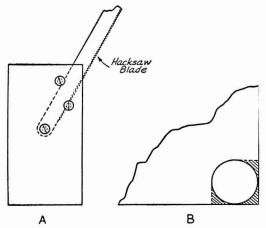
To cut rectangular holes in a chassis corner, holes may be filed out as shown in the shaded portion of B, making it possible to start the hack-saw blade along the cutting line. A shows how a single-ended handle may be constructed for a hack-saw blade.
